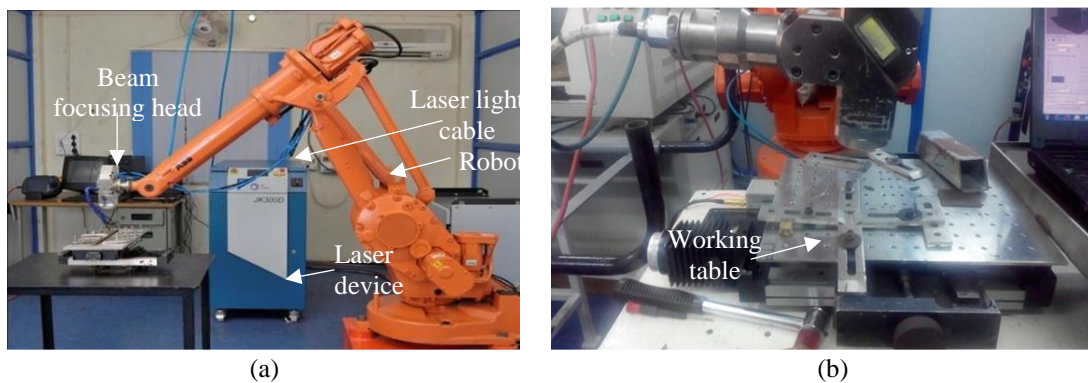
(a) Nd: YAG Robotic Laser Beam welding equipment and (b) experimental setup of Nd: YAG laser welding
